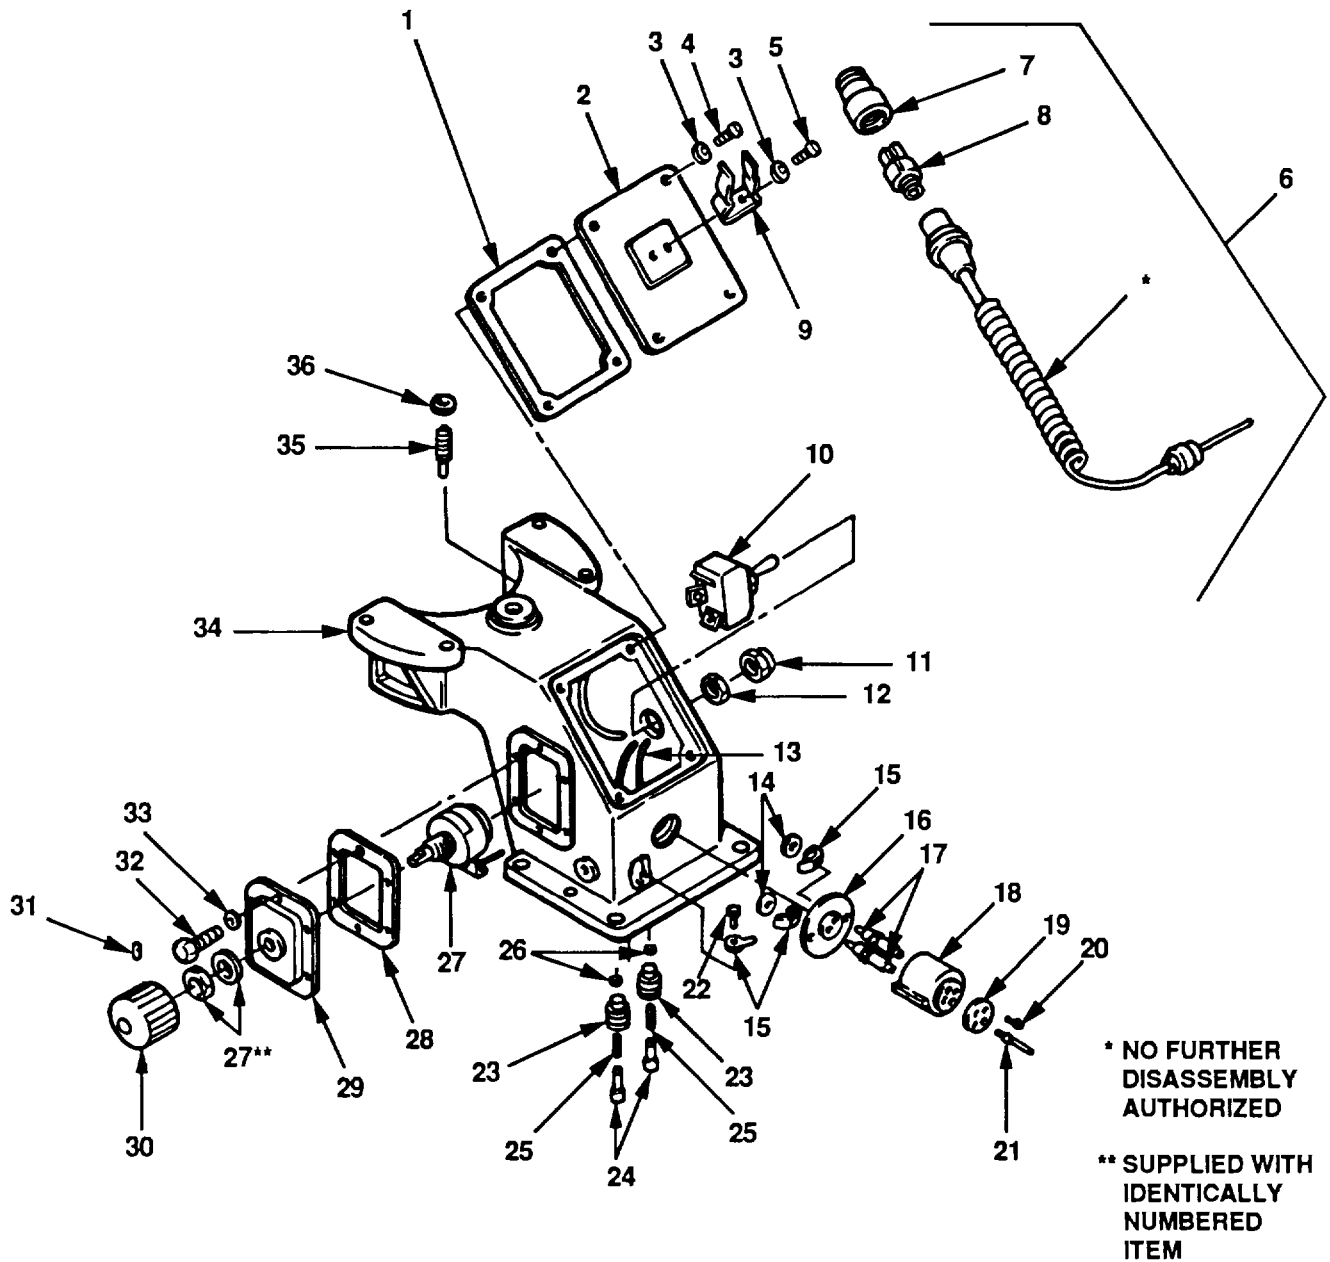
Mount Subassembly, Upper Telescope 8582223 and Light, Extension 8587510.
